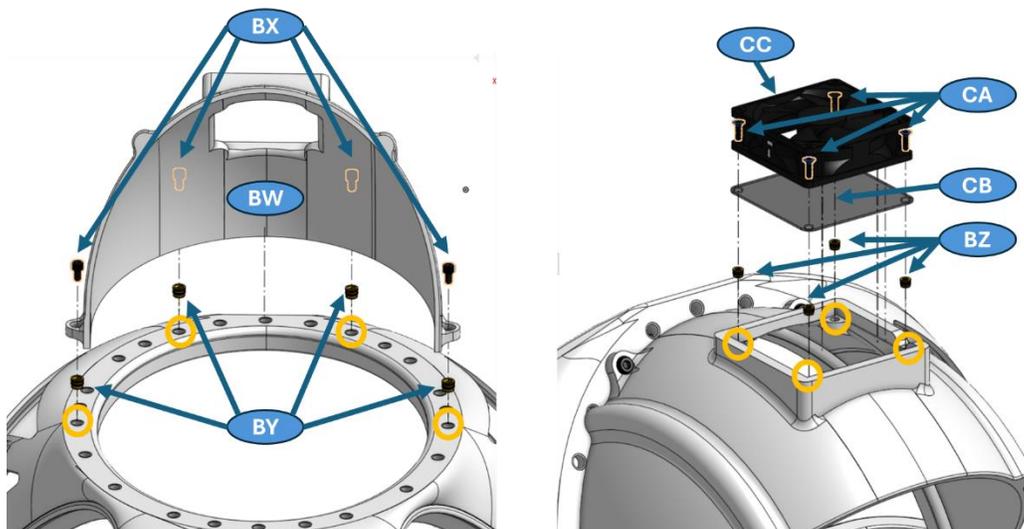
Visor Mounting and Visor Ventilation Fan Assembly and Mounting
